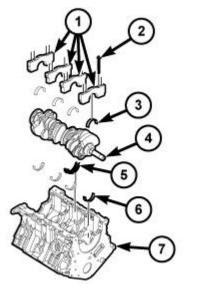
Main Bearing Caps, Bolts, Crankshaft & Engine Block Courtesy of CHRYSLER GROUP, LLC
